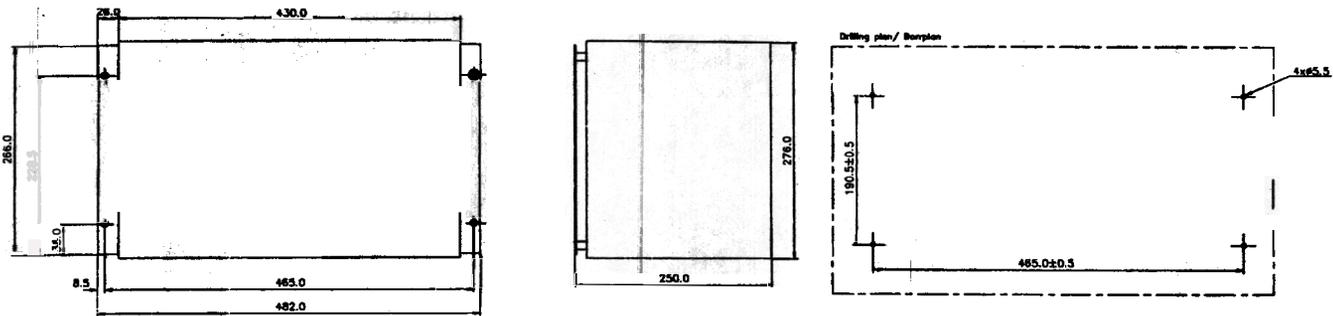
Dimensions and mounting of a apparatus plate with voltage injection unit for cubicle installation
